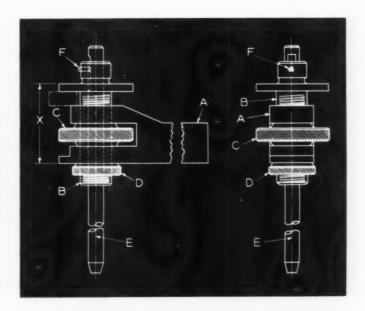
Adjustable gage simplifies setting of work-rest on a centerless grinding machine.
